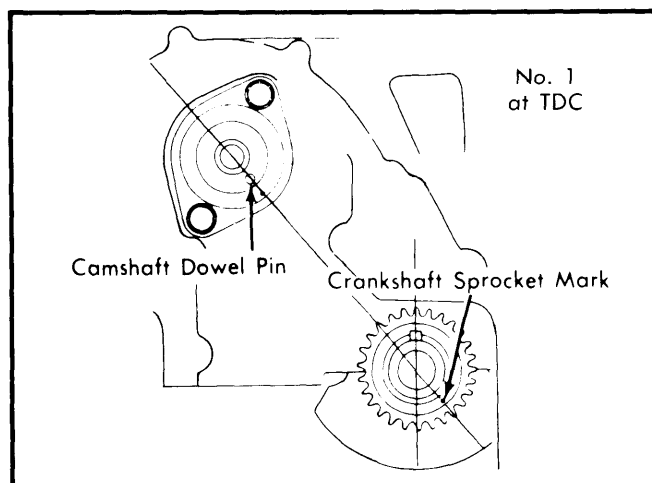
Aligning Marks for Timing Chain and Sprocket Installation
